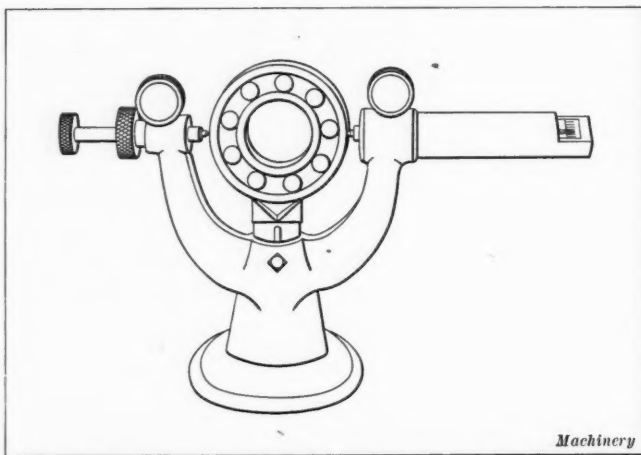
Special Type of Three-point Gage using Hirth Minimometer for testing Roundness and Diameter of Assembled Ball Bearing
